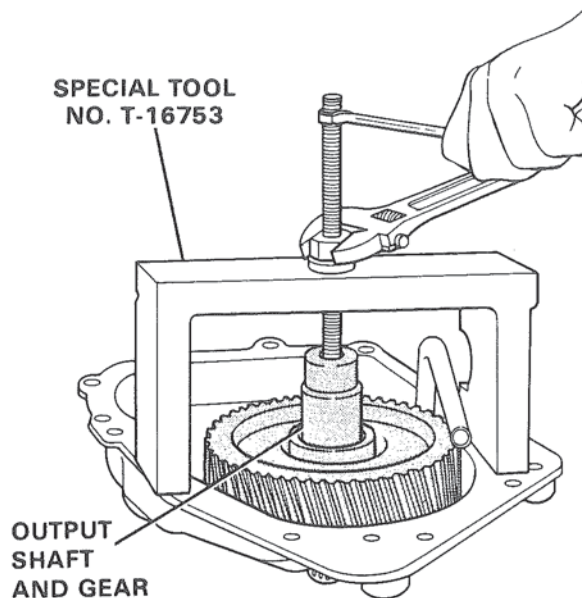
Removing Output Gear and Shaft from Rear Bearing Assembly. (Special Tool No. T-16753).
